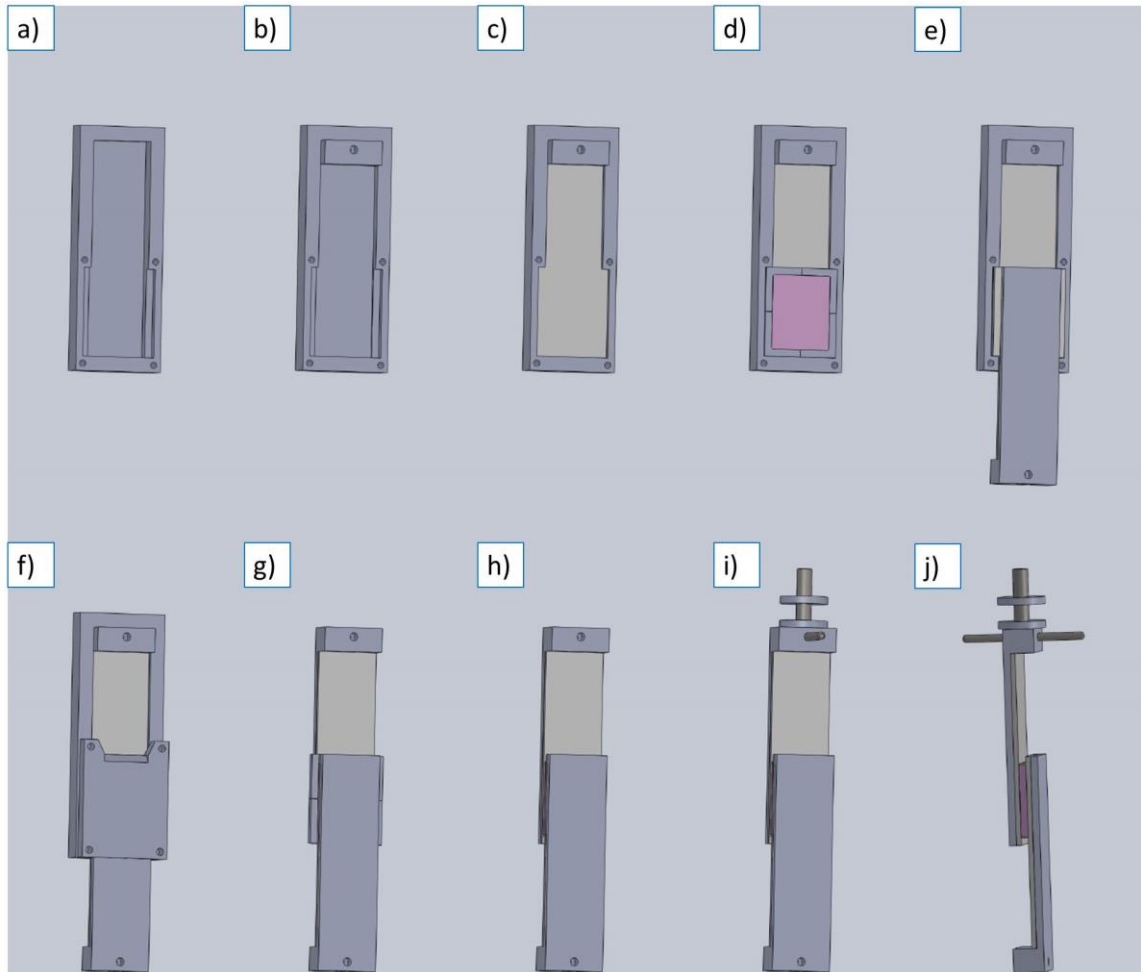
Sample holder kit design: a) mold backplate; b) backplate with support for mounting PDMS wafers to Mach-1 tester; c) assembly in (b) with PDMS wafer inserted (held to the plastic support via double-sided tape); d) insertion of mold walls and subsequent addition of polymer precursor solution (pink); e) second PDMS wafer (mounted on the support via double-sided tape) added; f) top plate added to secure second PDMS wafer/support (assembly screwed together until hydrogel cures); g) removal of back plate and top plate following gel curing; h) removal of mold walls following gel curing; i) insertion of mounting screw on top of assembly (bottom plate is attached to the base of the tester using the same method); j) mounting of test assembly to the instrument.
